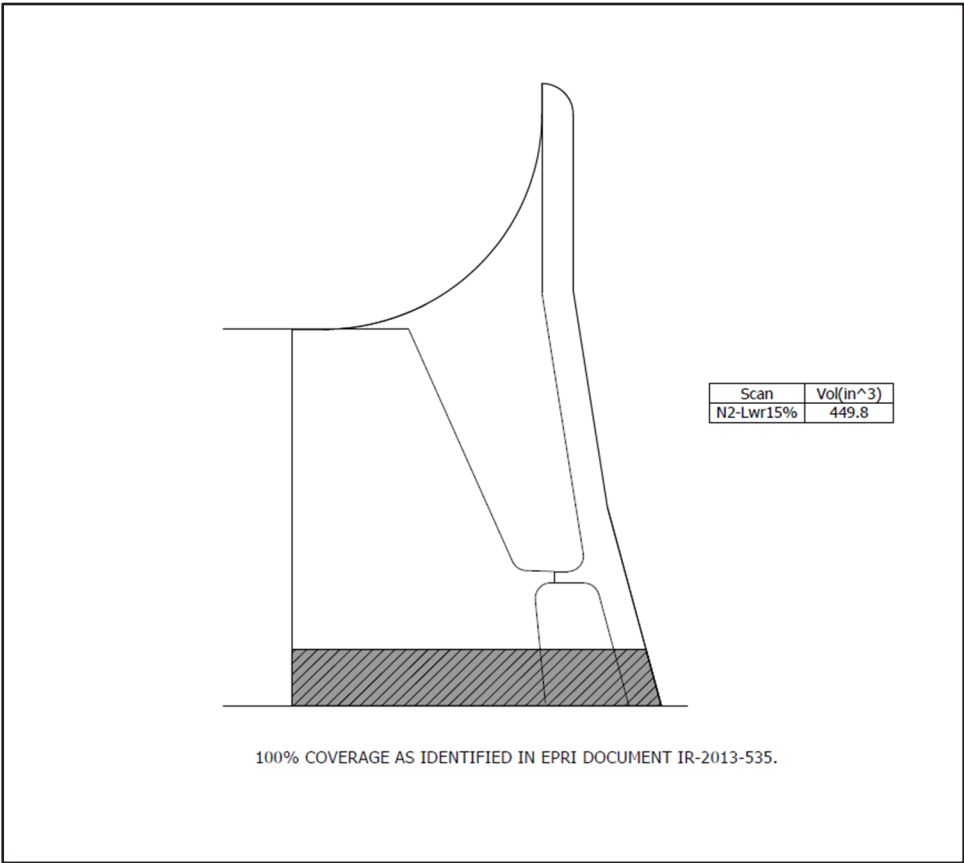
Weld N2H-NV, Inner 15% Radial Coverage Achieved
